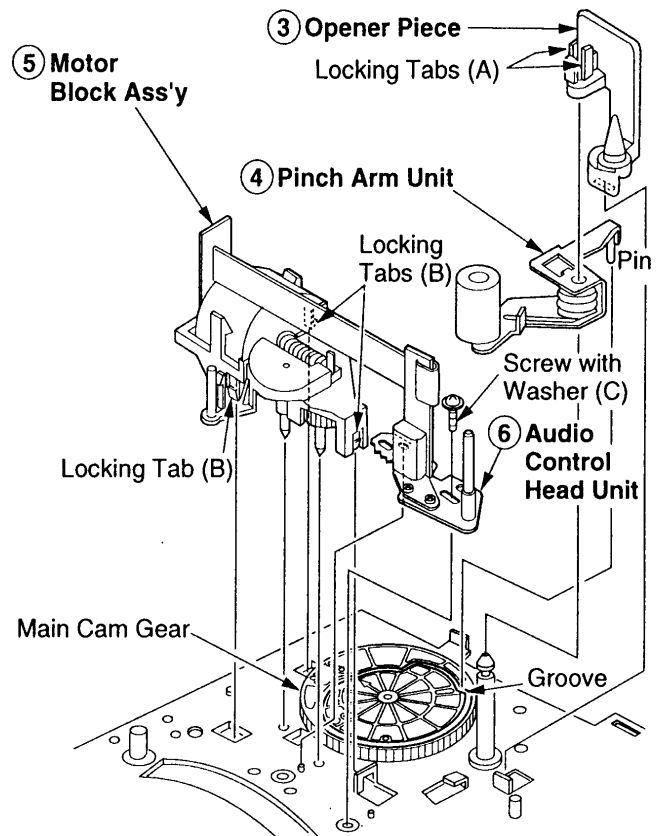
Opener Piece/Pinch Arm Unit/Motor Block/Audio Control Head Removal
